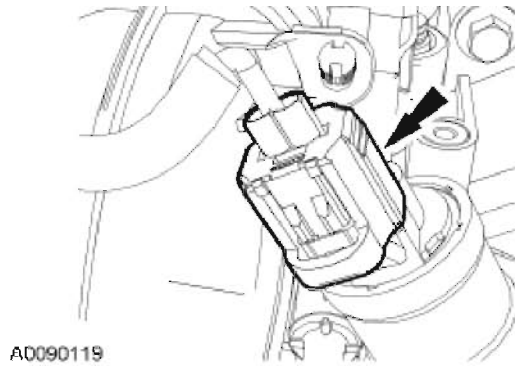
Locating Fuel Rail Pressure, Temperature Sensor Electrical Connector & Vacuum Tube
